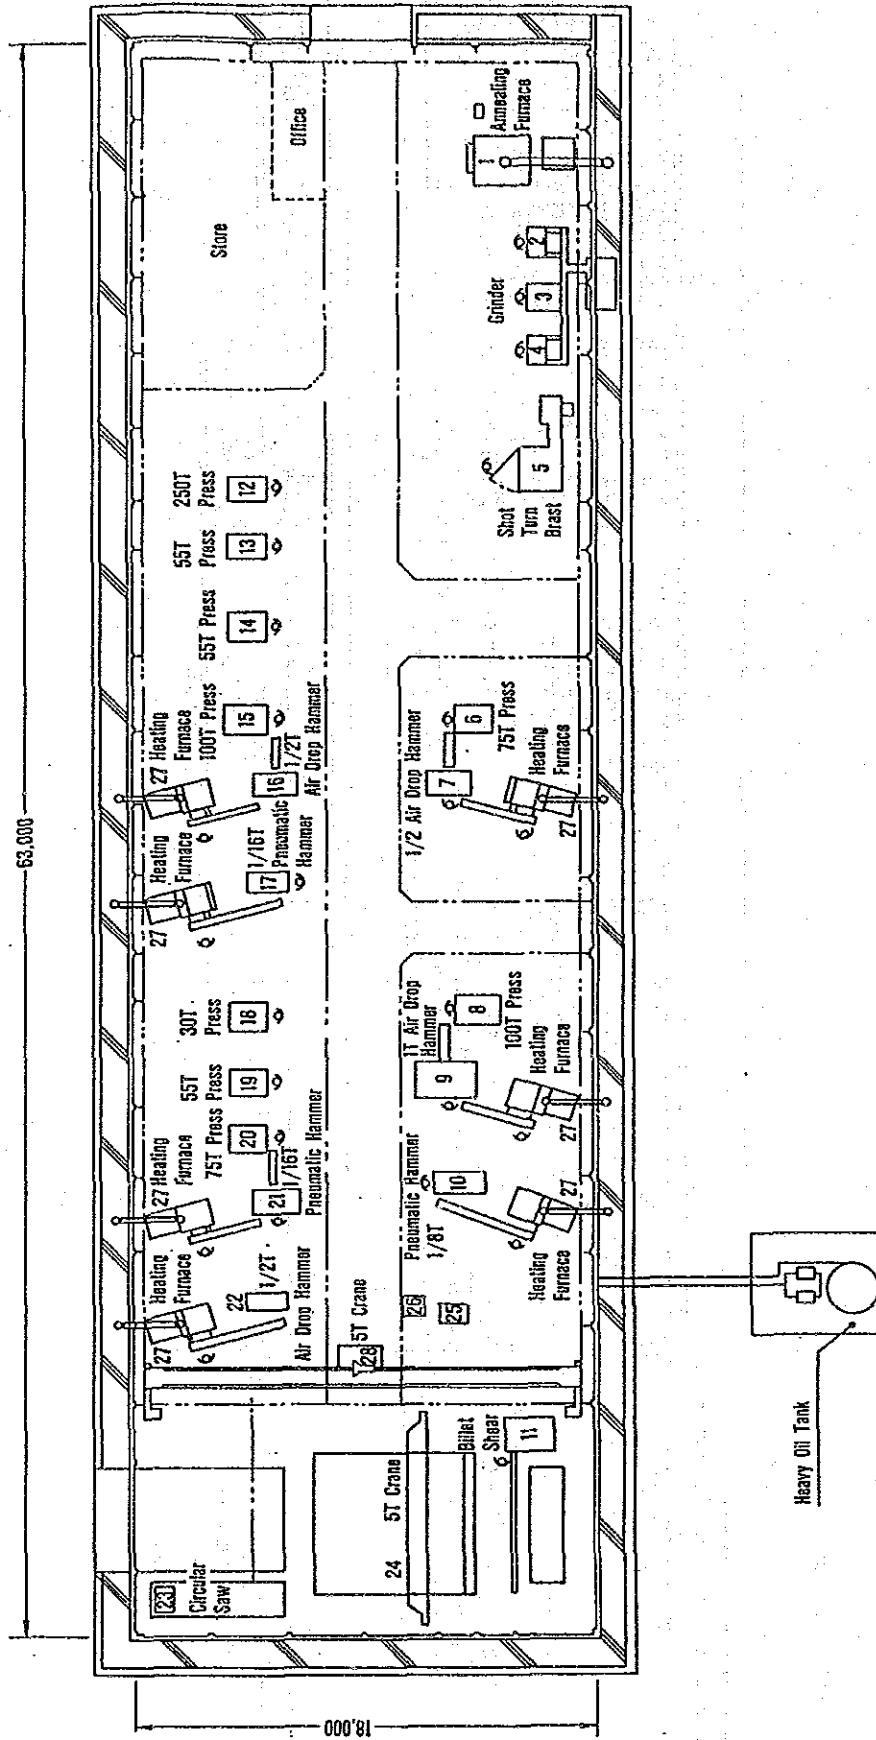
ORGANIZATION OF HAND TOOL FORGING SHOP
